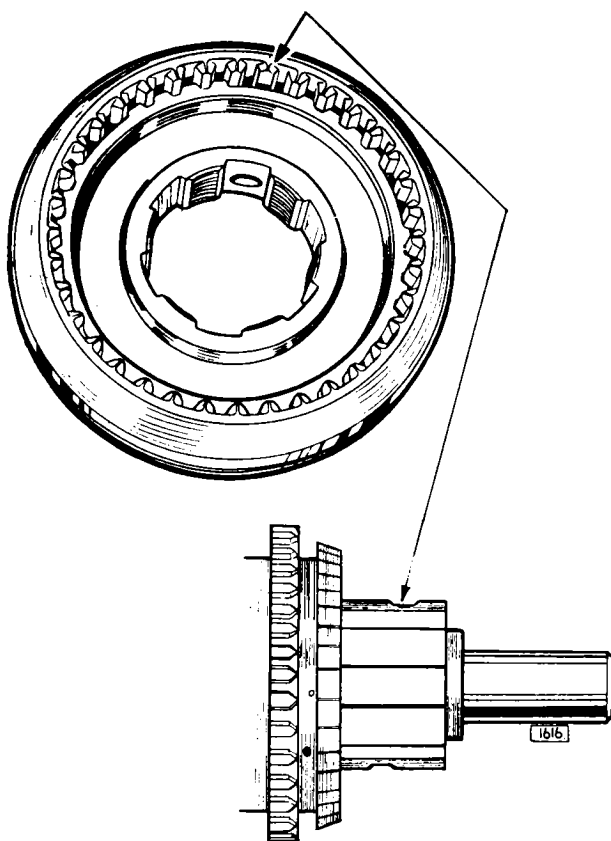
The relieved tooth at the wide chamfer end of the outer operating sleeve must be in line with the foremost groove in the mainshaft.
